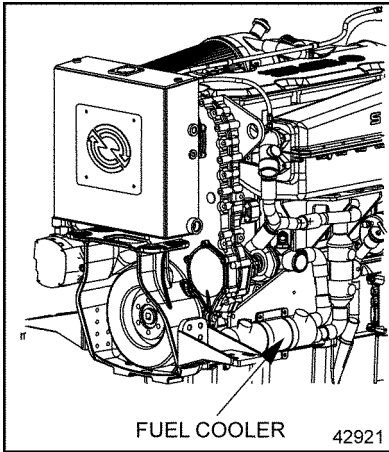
Fuel Cooler Location – Keel-Cooled Commercial Marine Engine
